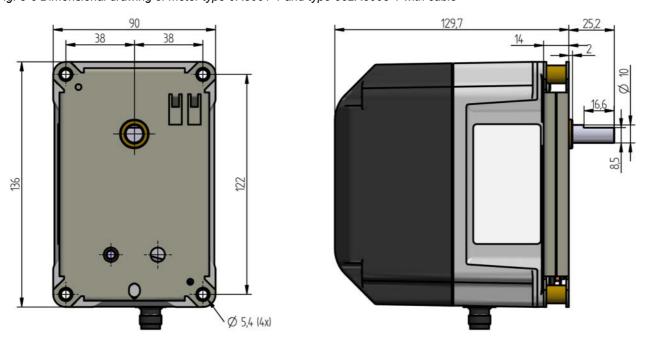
Dimensional drawing of motor type 660R5009-0 without cable but with plug
